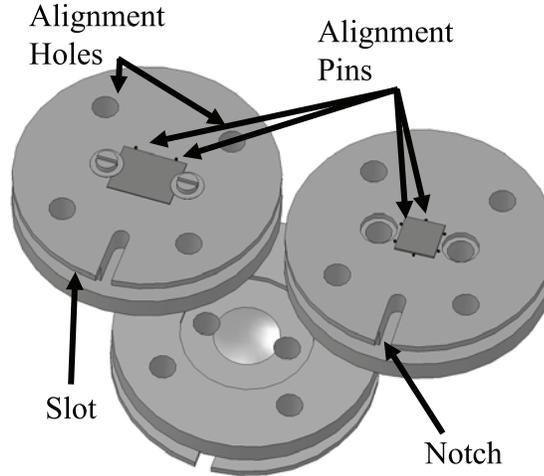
Models of the Mo pucks used for bonding InGaAs and Si samples. The left puck uses two screws to hold a 12.5 mm x 10 mm Si sample. The Si puck is flipped upside-down during the bonding process. Two removable alignment pins are used to align the crystal axes of the Si. The right puck holds an 8 mm square InGaAs sample. Six alignment pins are used to align the crystal planes. The pucks have four holes for alignment, a slot for a transfer fork, and a notch that matches the transfer fork to prevent rotation of the puck during sample transfer. The top surfaces of the holders are polished where the samples sit to prevent cracking of the samples due to surface roughness. The bottom puck is a model of the bottom of the Si puck. A dome feature is used to ensure uniaxial pressure between the pair of pucks, sitting on the sample platform, and the static center rod during the bonding process.
